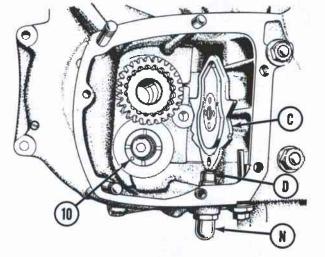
If needle bearings (11 and 12-Fig. TM4-34) are removed, bearings should be installed using a special drift. The bearings should project 0.073-0.078 inch (C) into the housing.
